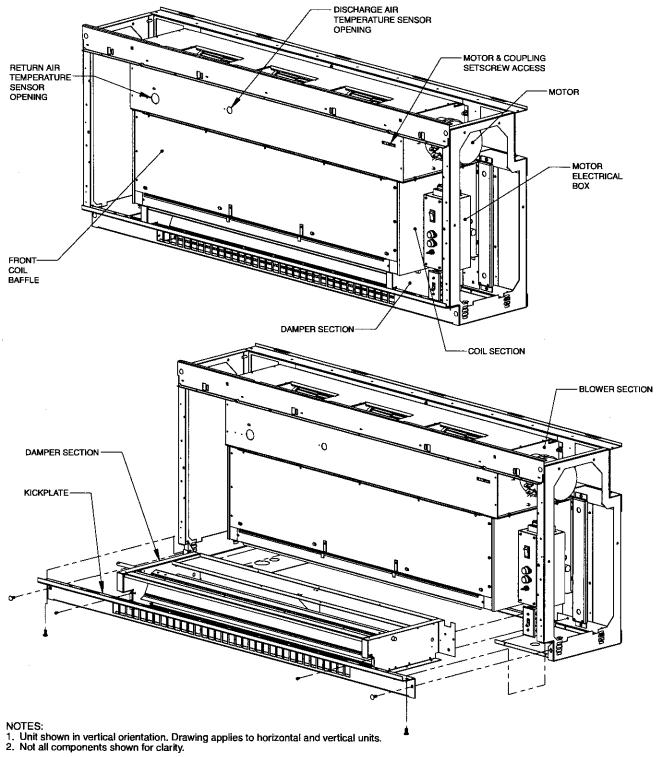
40UV,UH Ventilator Damper Section Removal/Installation
